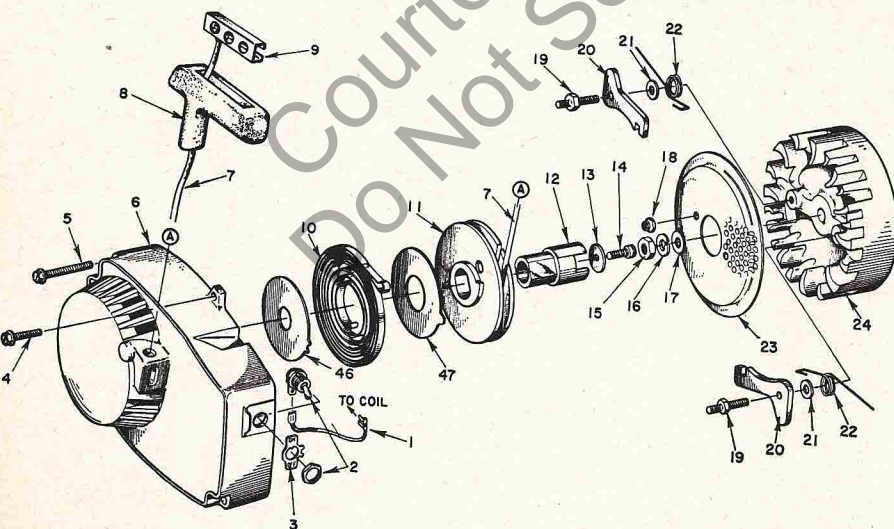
A — Exploded view of late rewind starter and related parts. Plastic shields (46 and 47) keep sawdust out of rewind spring (10) and dampen noise.
